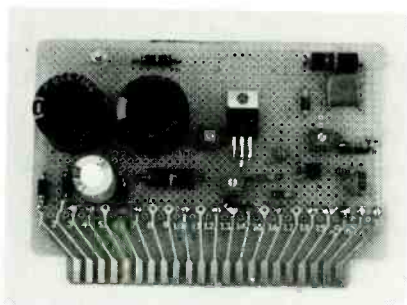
MOST OF THE CIRCUITRY is contained on a 44-pin edge-connector-perforated construction board.
